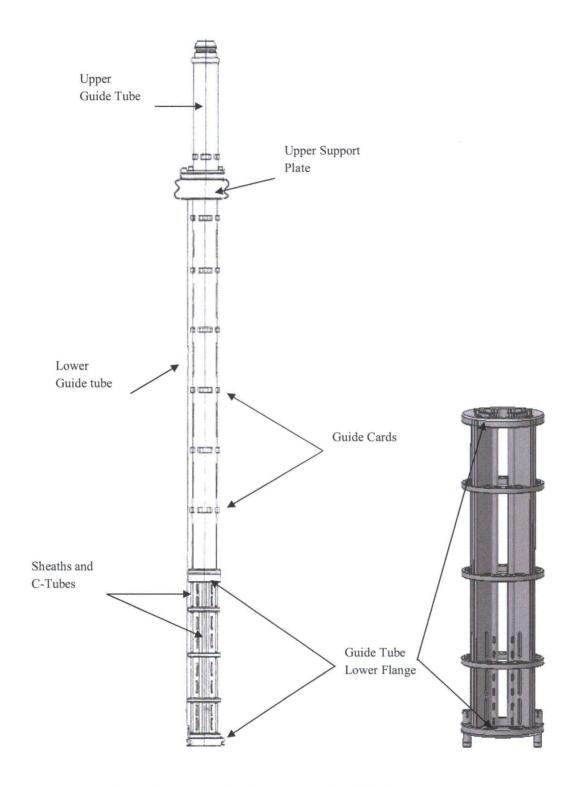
Lower Section of Control Rod Guide Tube Assembly
